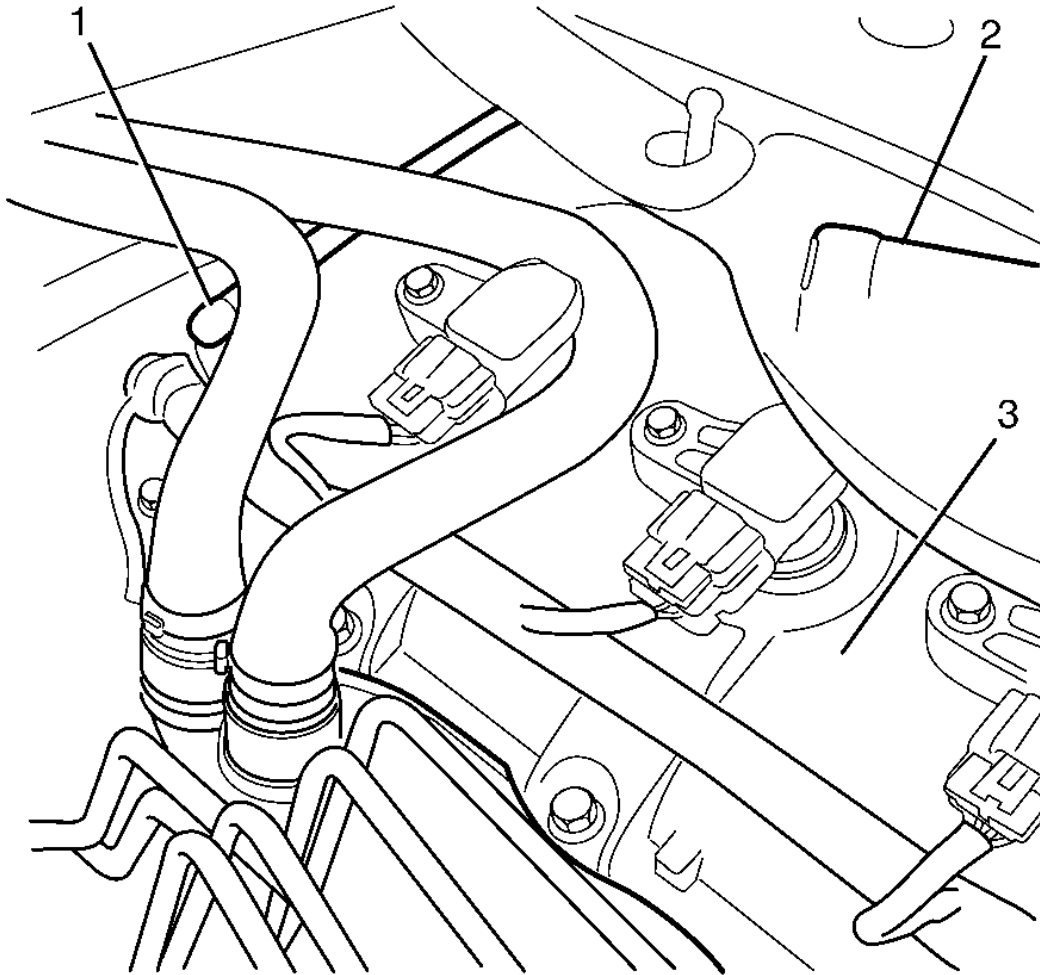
Identifying PCV Tube & Air Intake Assembly
